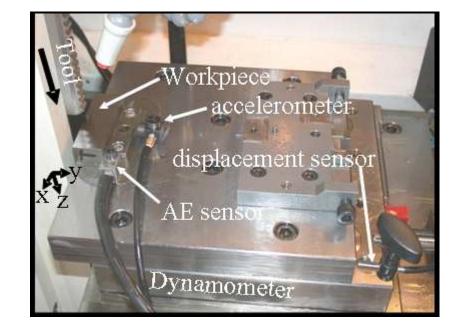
Location of the sensors on the broaching machine table. 69x51mm (150 x 150 DPI)
